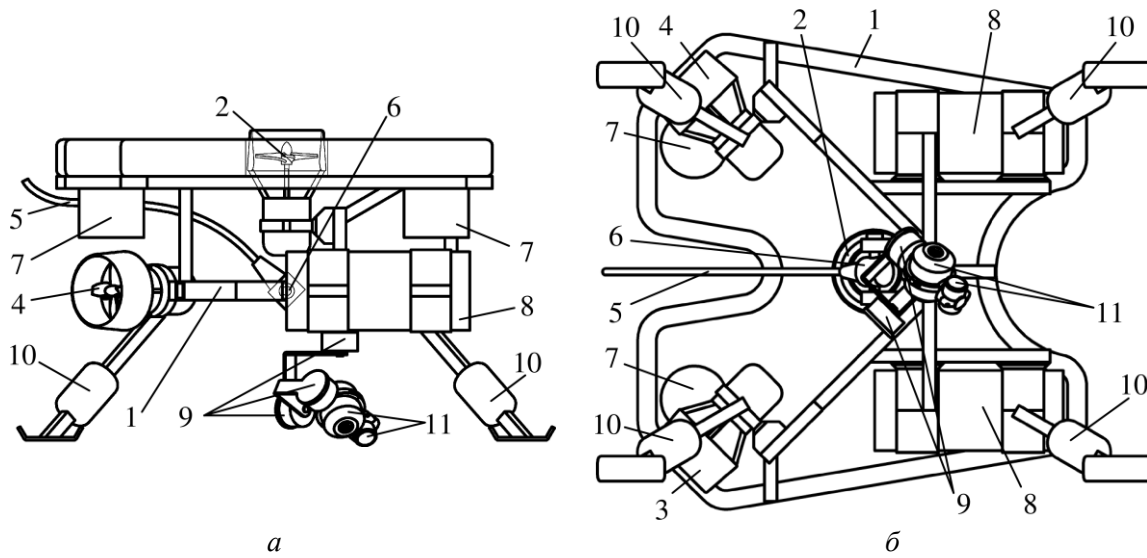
ROV design drawing: *a* – right-side view, *b* – bottom view
